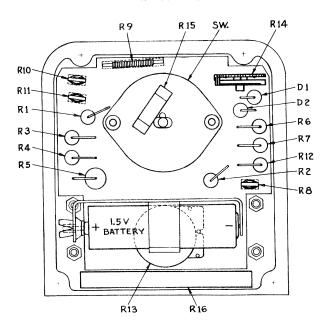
LOCATION OF PARTS ON PRINTED CIRCUIT BOARD
